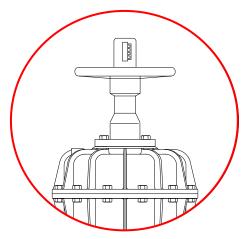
Top mounted manual handwheel unit (T-0, T-1)
